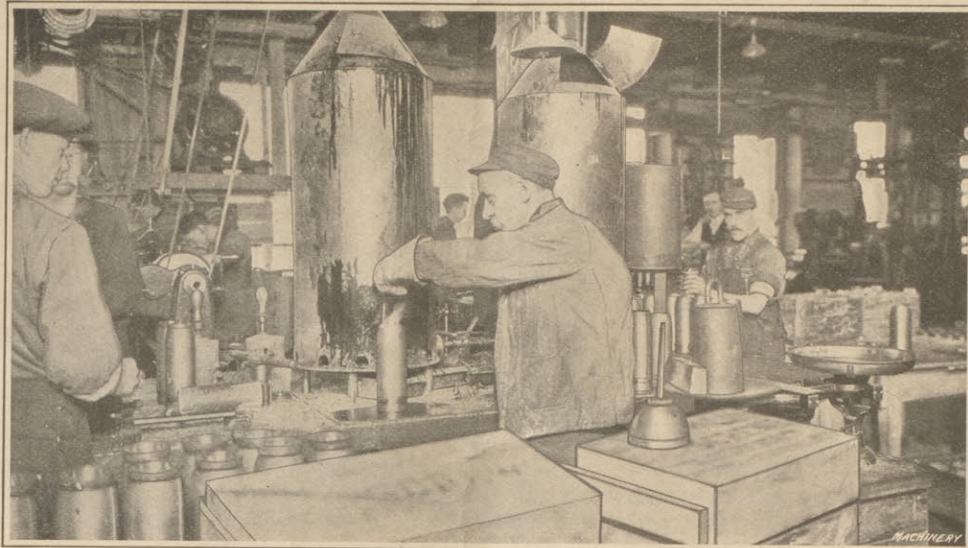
Assembling Bullets, Resin and Fuse Socket in Shrapnel Shell
